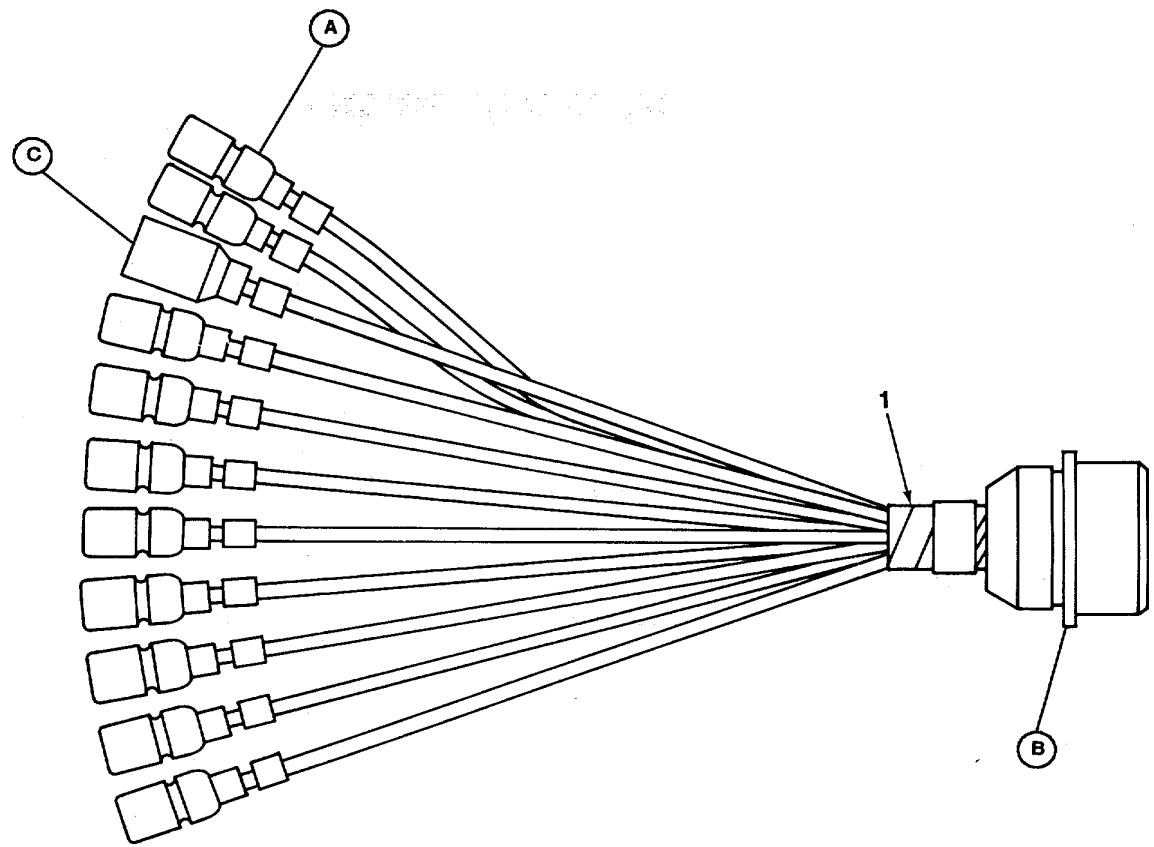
POWER SOURCE TO OUTRIGGER RELAY HARNESS ASSEMBLY.
